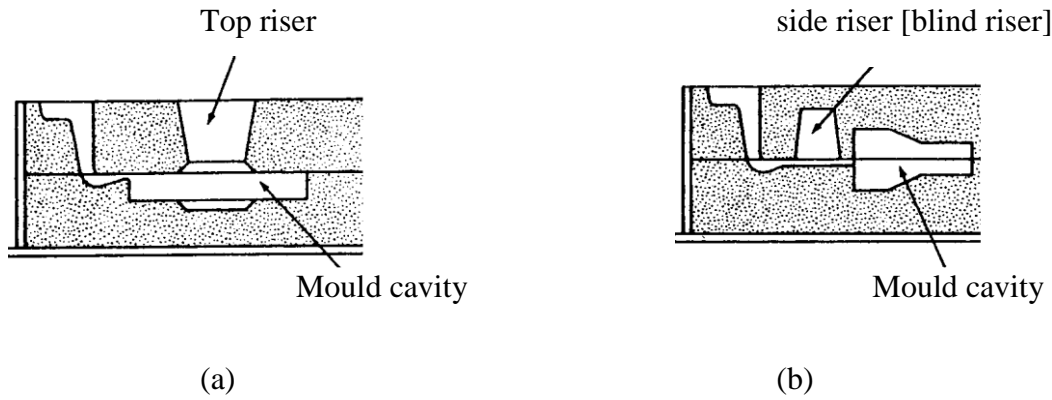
FIGURE: Schematic of a sand casting mould, showing a top riser (a) additional pressure and a side riser (b).
